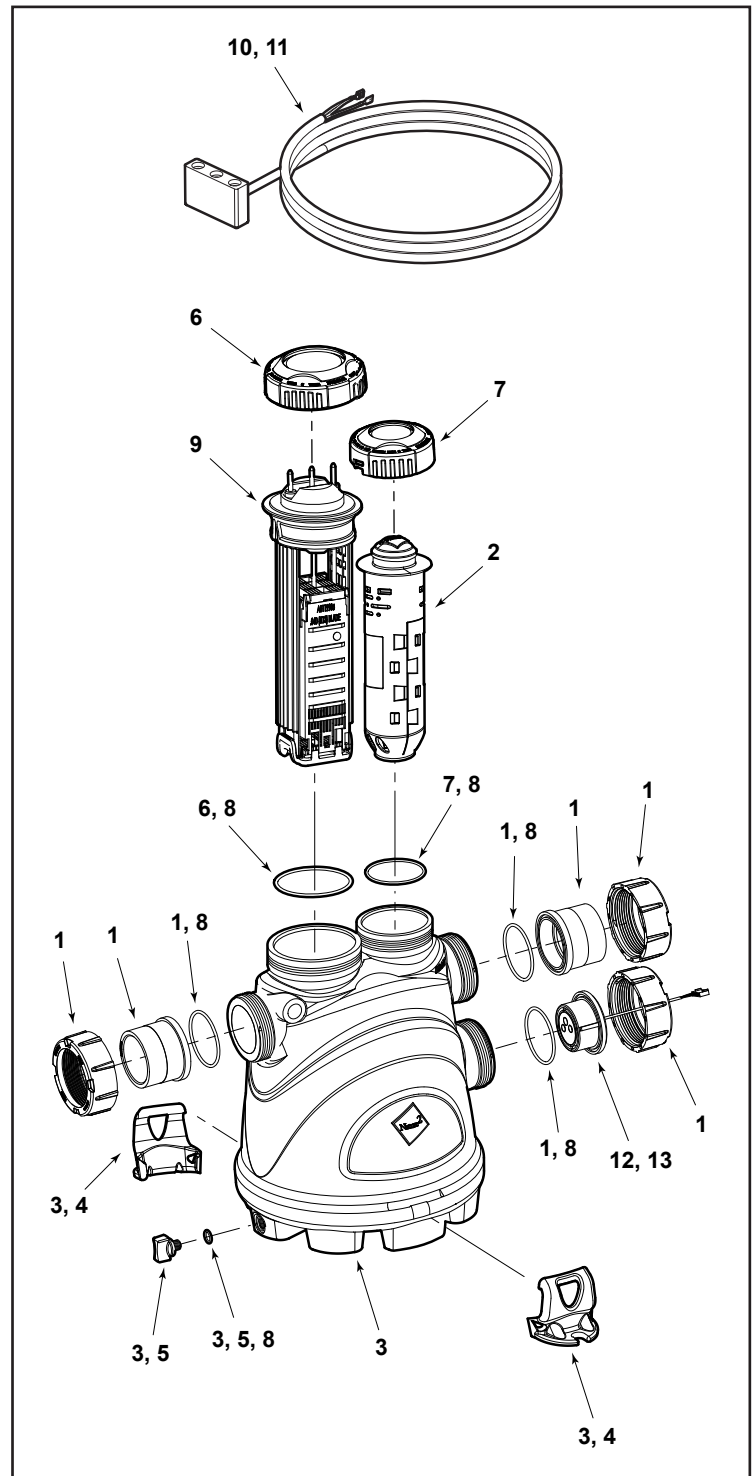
Nature<sup>2</sup> Fusion Soft Vessel Exploded View
